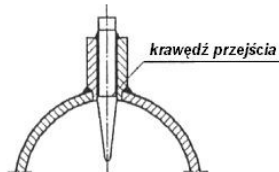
The transition edge should be moved back slightly to inside of the hole
